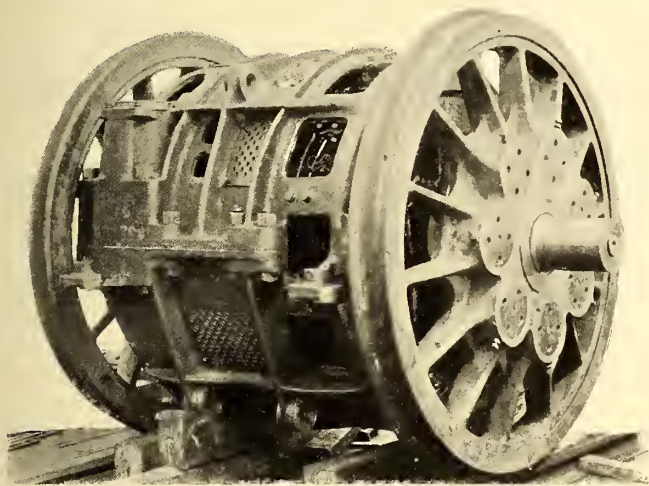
A PAIR OF WHEELS WITH MOTORS MOUNTED IN PLACE
